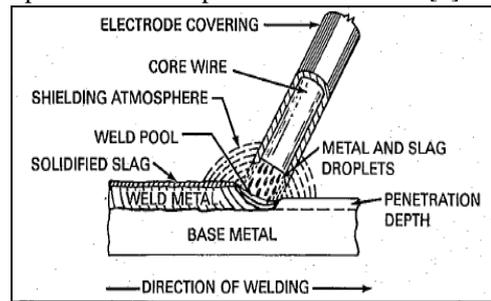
Shielded Metal Arc Welding Process [6]
